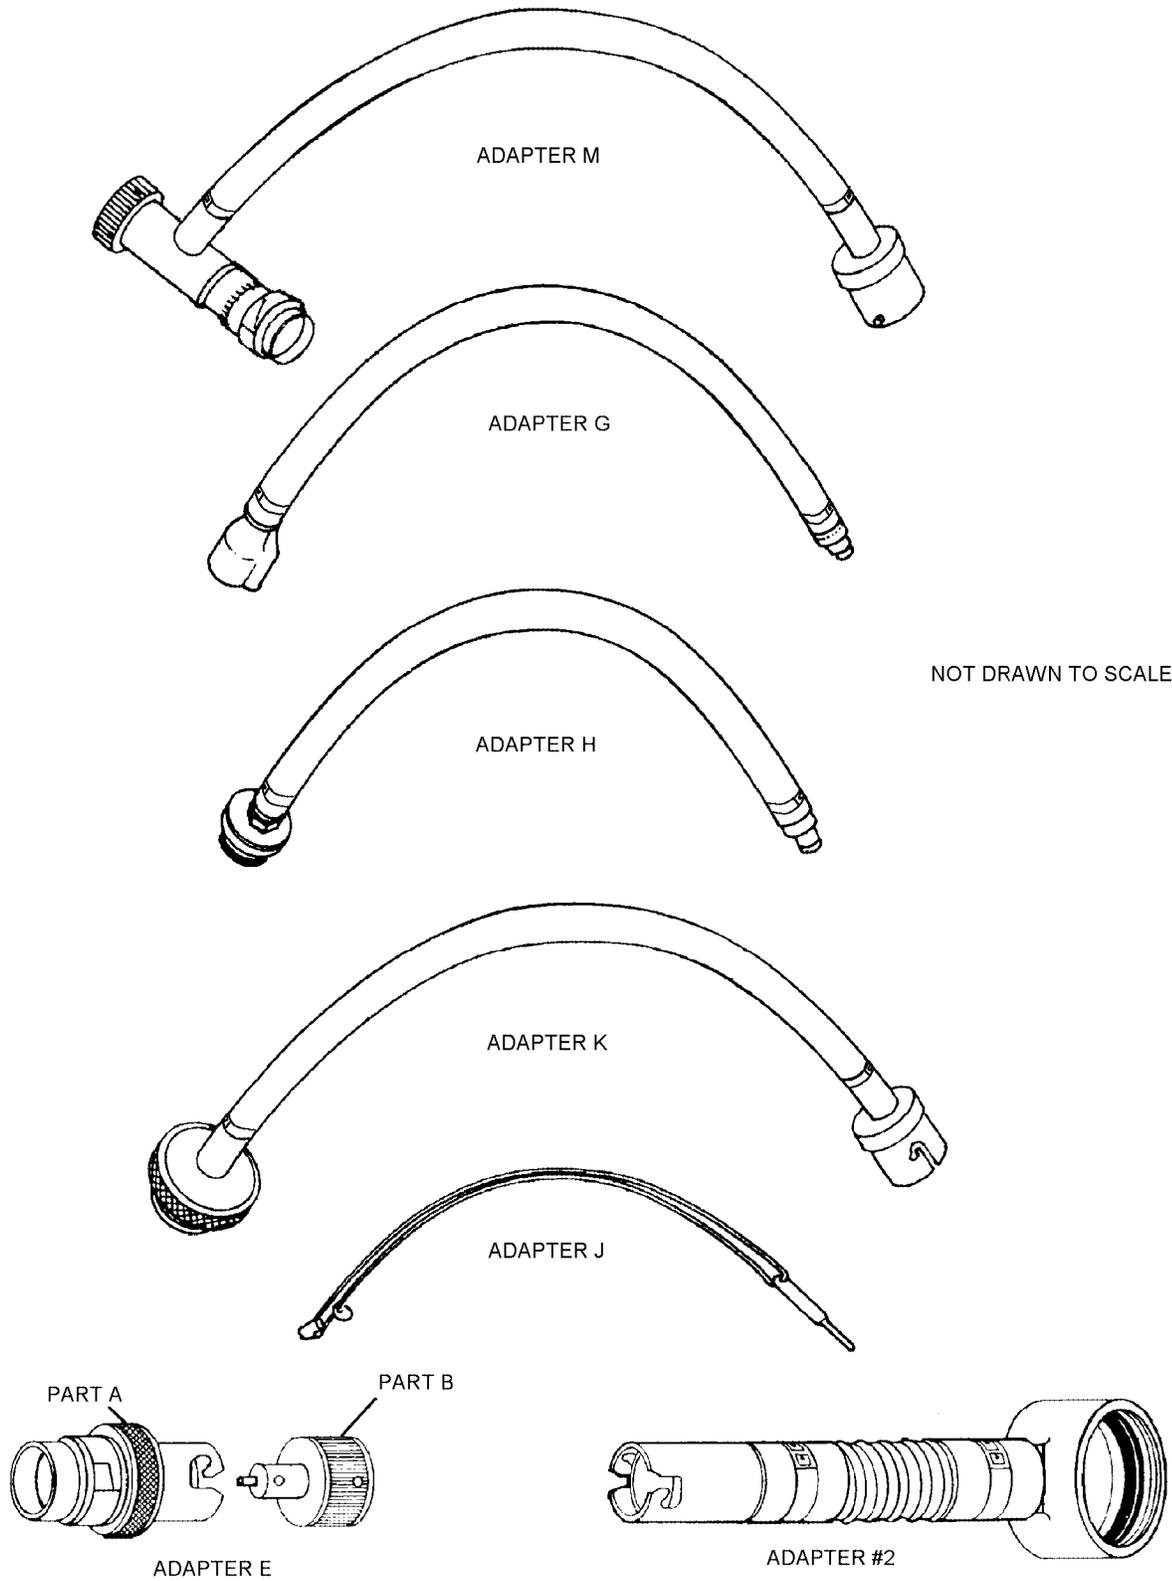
Respirator Assembly Test Set Components - A/E47T-28 (Sheet 3 of 3)
